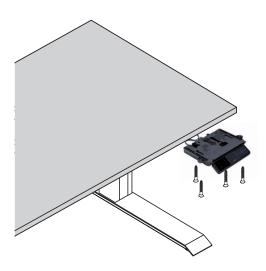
Attaching LegaDrive Touch Comfort handset to example desk
